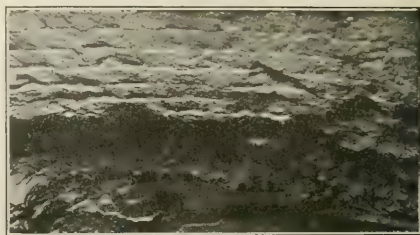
ROOF OF BASIC OPEN-HEARTH FURNACE SHOWING FAILURE DUE TO UNEQUAL WEAR AS A RESULT OF SLAGGING AND SPALLING
